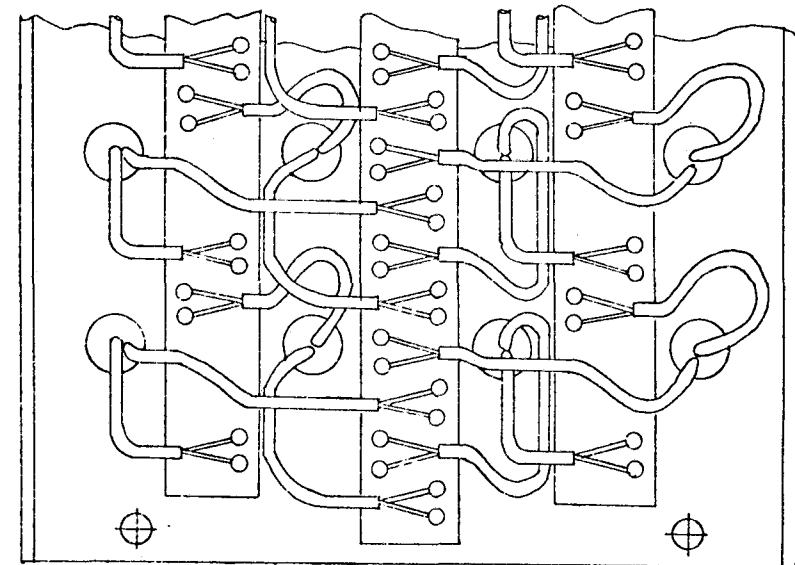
Physical arrangement of the screened wiring-rack of the power supply within a drawer. 1/4 of the drawer is shown.
